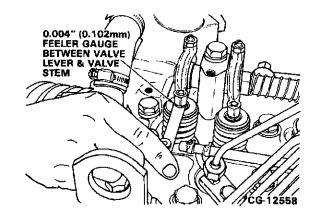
Insert.004" Feeler Gauge at #1 Valve Lever
